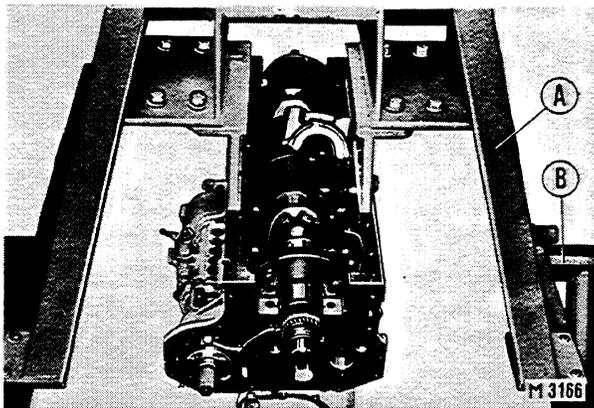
Crankshaft on the engine (connecting rod caps and main bearing caps removed).
